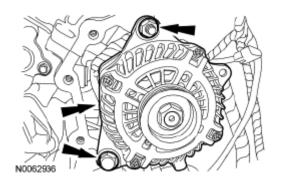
Locating Generator Nut And Bolt Courtesy of FORD MOTOR CO.
